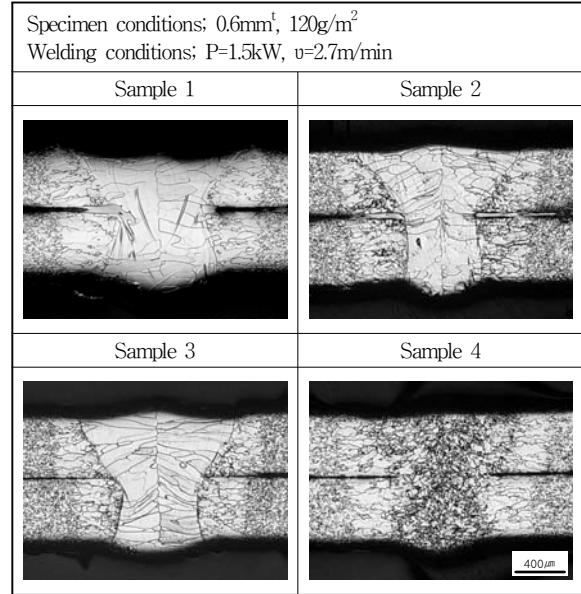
Weld cross-section of surface pre-treated specimens
